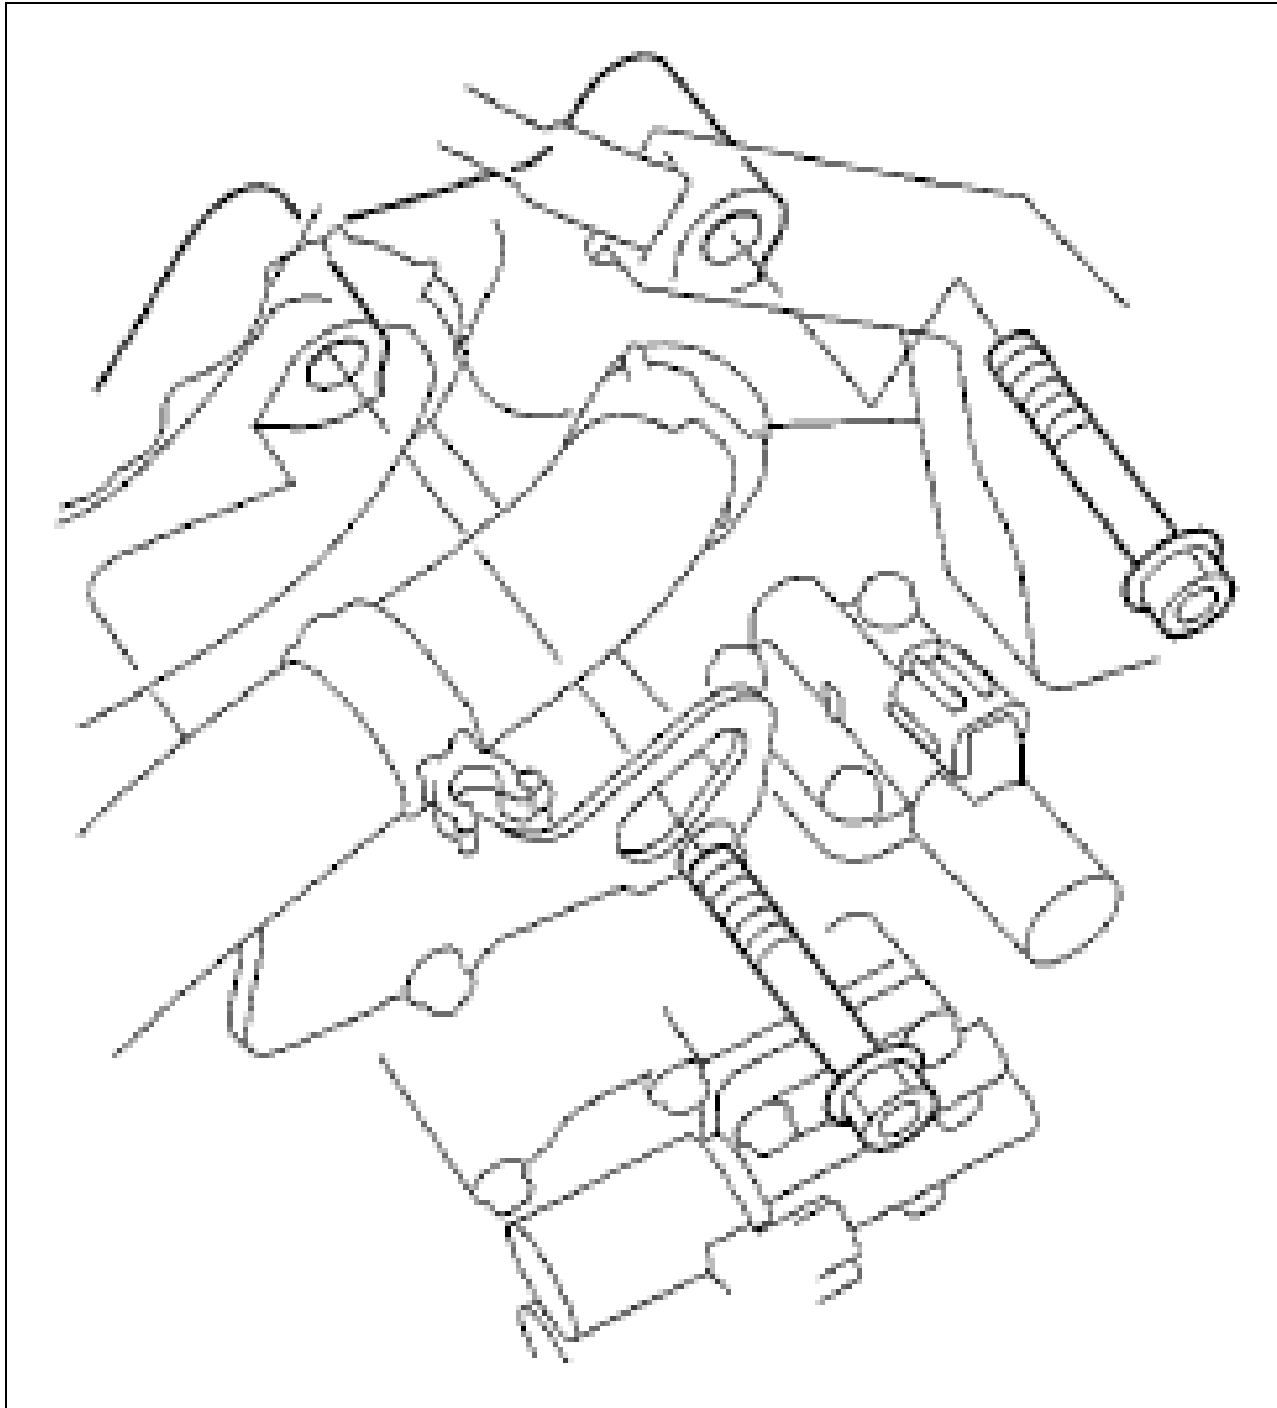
Identifying Engine Balancer Bar, Front Cylinder Head And Spacers
